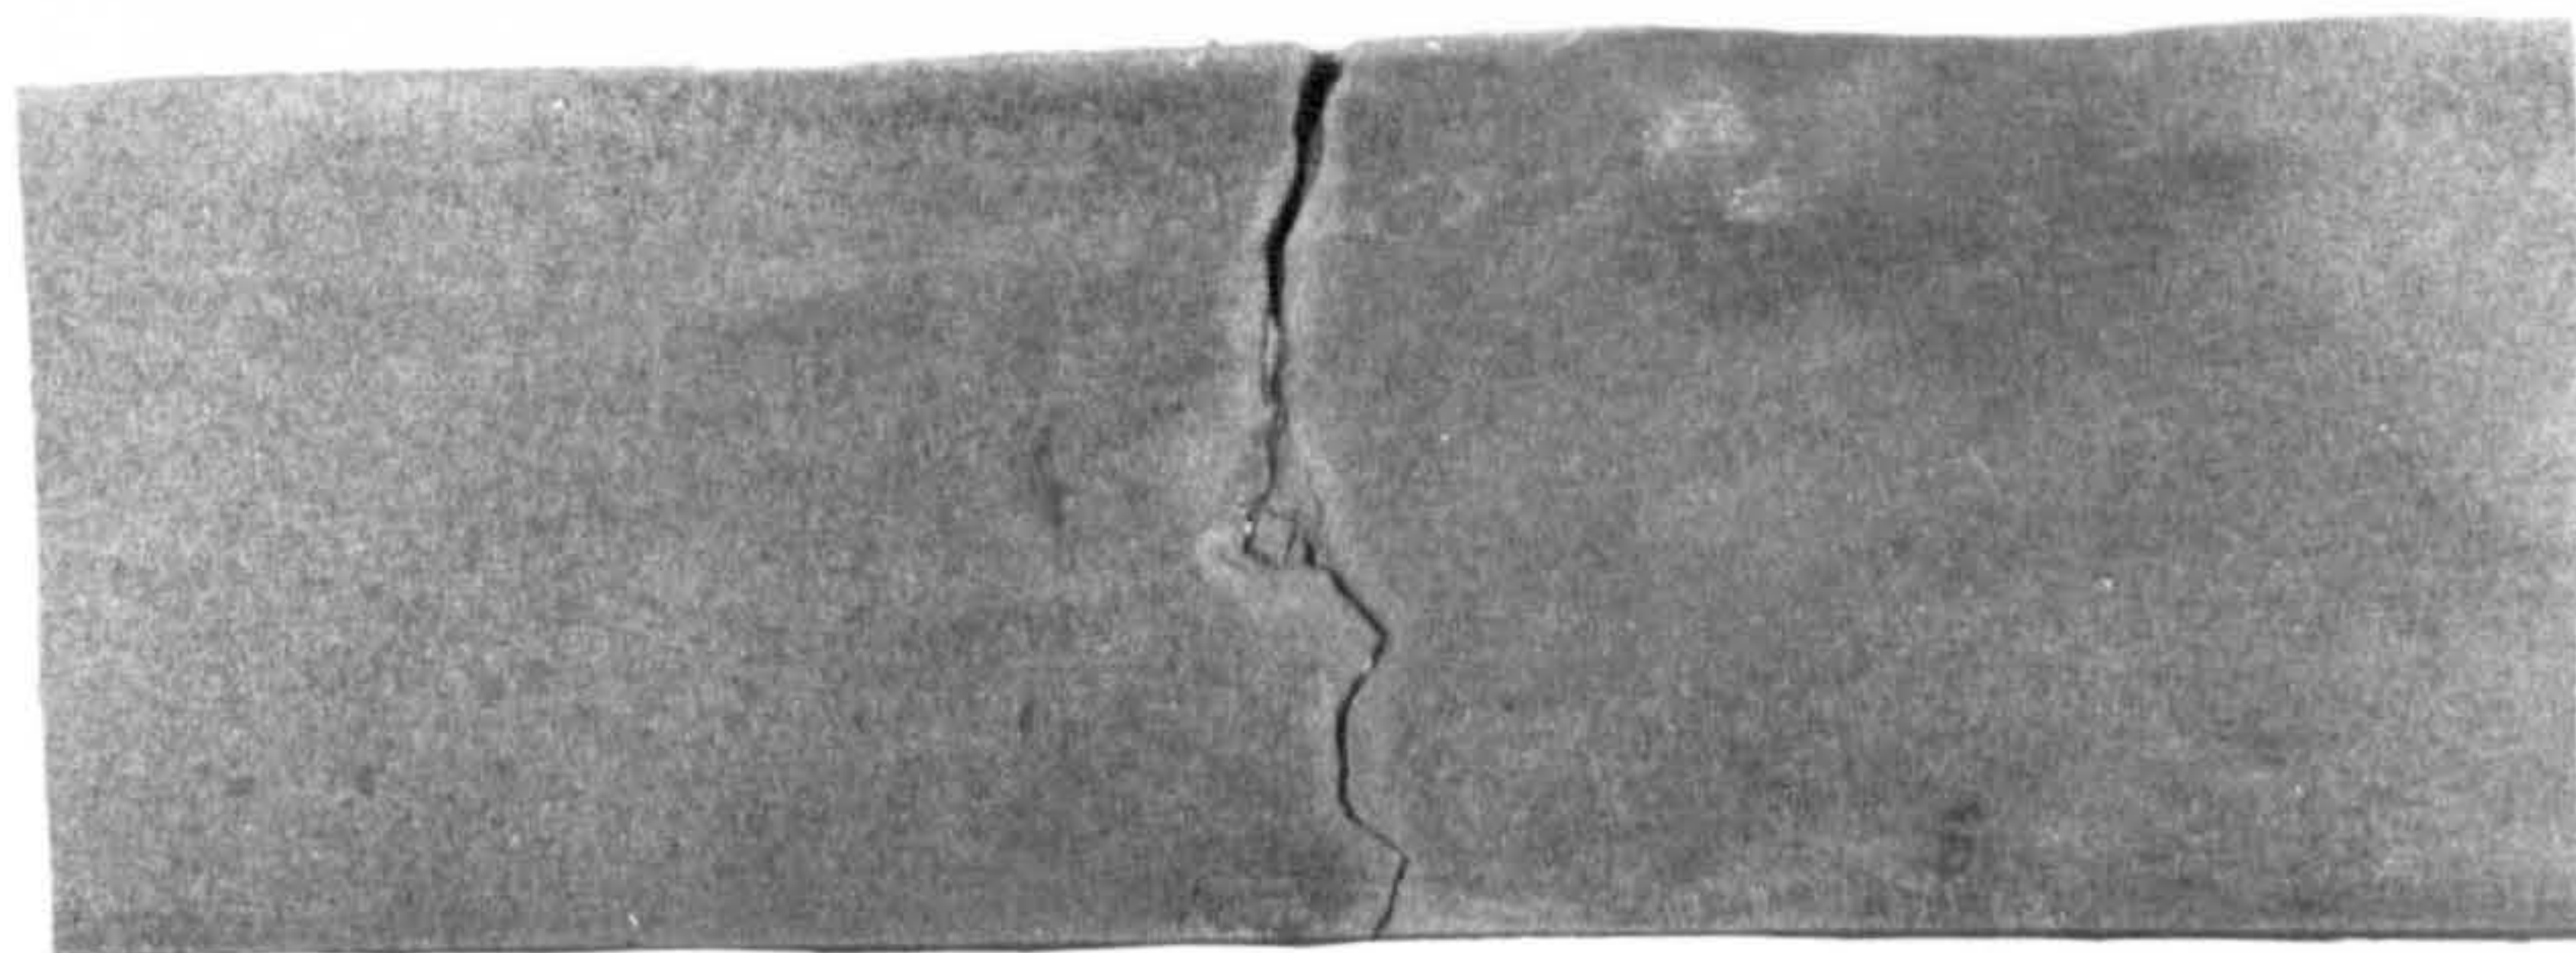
Macro-etched section through a crack, showing the intergranular path. Mag X0.75
